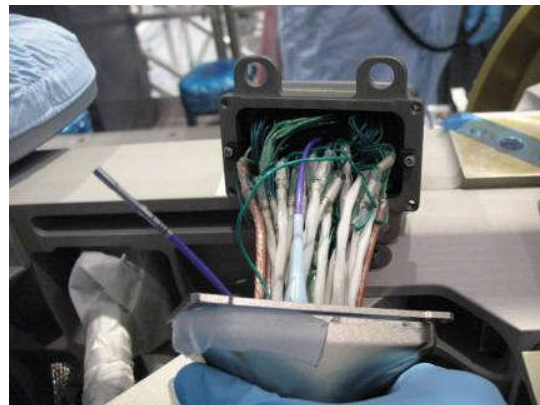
Inside view of assemblies out of the back end of an ExPCA connector body
